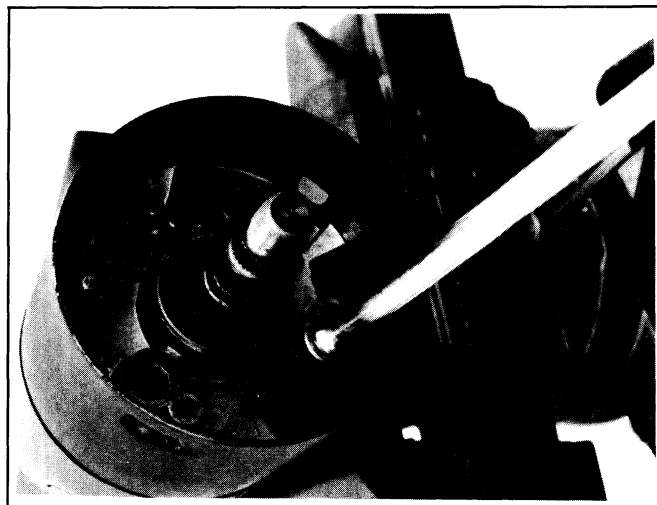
B-104--Removing Housing and Shroud to Jacket Screw - Corvette
